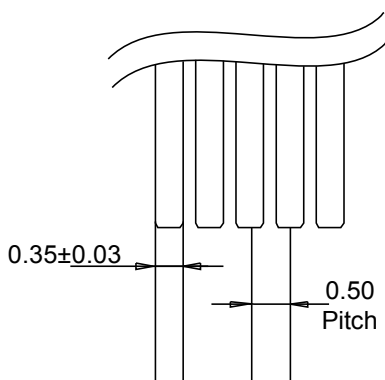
Edge Connector Dimensions of the Qseven™ Module
